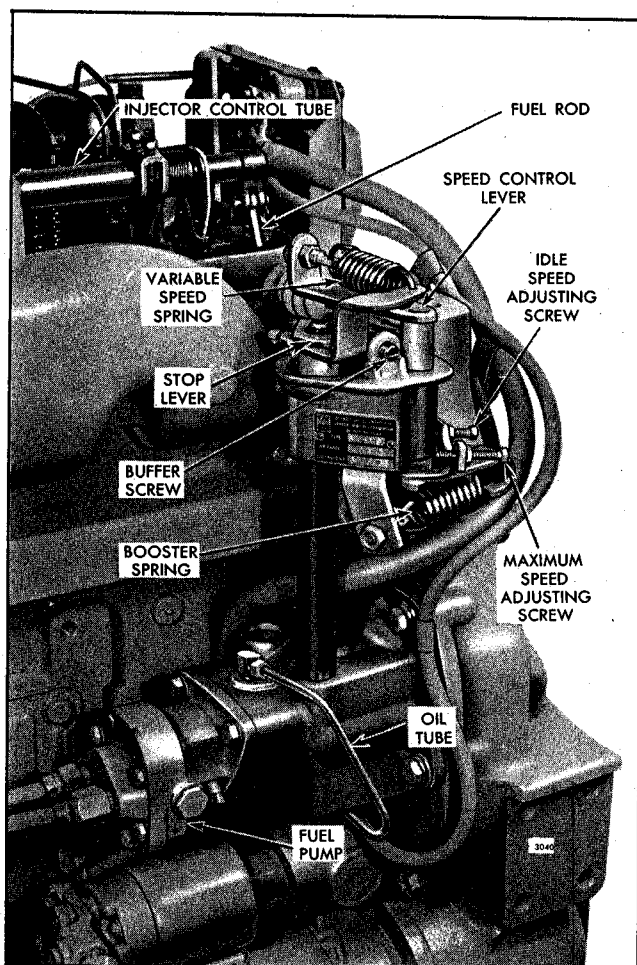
Variable Speed Open Linkage Governor Mounted on Engine
